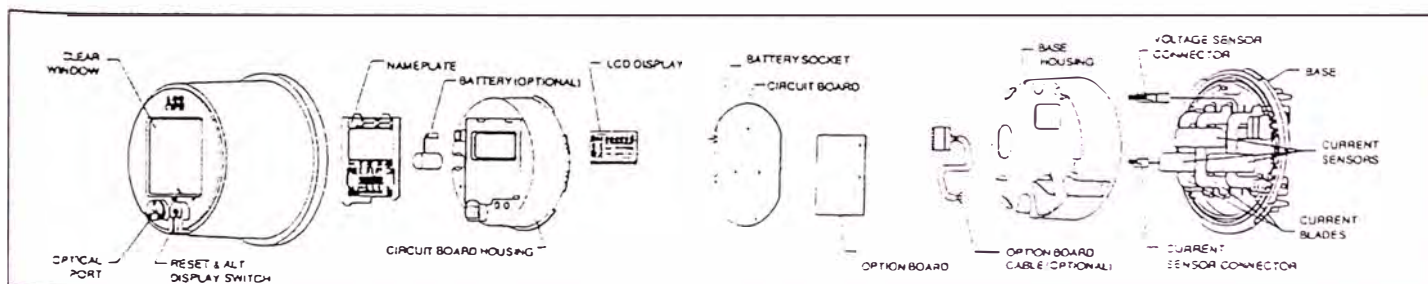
Exploded view of Alpha Meter Primary Components and Assembly. Alpha Meters all use common components and subassemblies with only the base changing according to whether the unit is socket-mounted or bottom-connected. (Exploded drawing of socket base unit shown below. Photo of major components and construction of bottom-connected (A-Base) unit shown to the left. Except for the base assembly, construction and assembly is identical.
